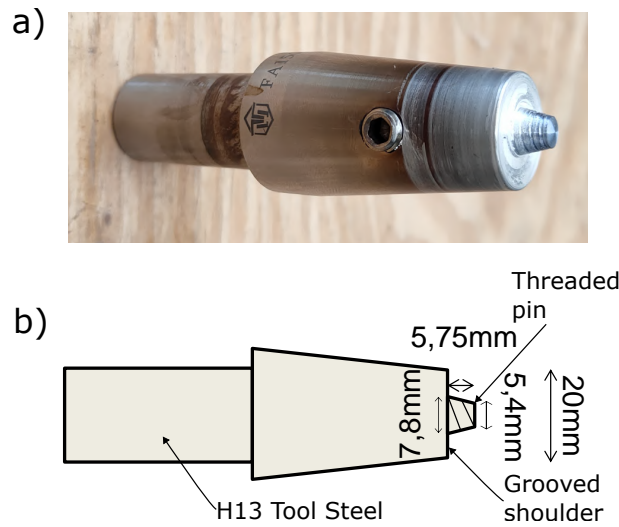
(a) Picture of the FSW Al/Al tool used (b) Schematic of the steel FSW tool used in the manufacturing of aluminium similar and dissimilar joints.
